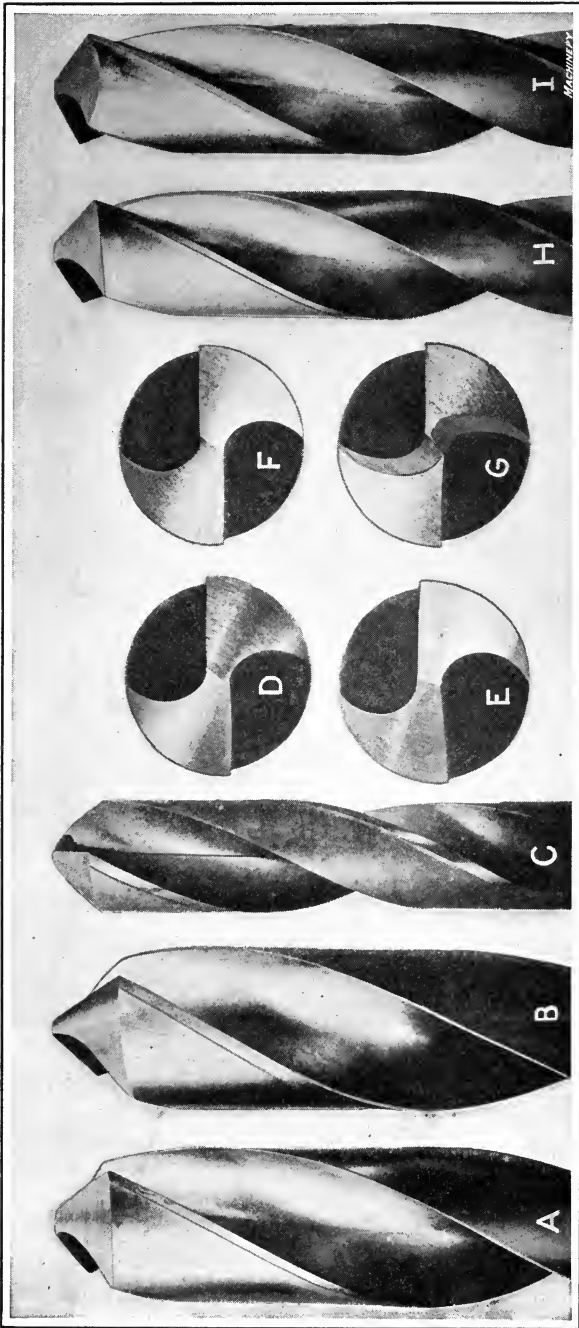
(A) Drill with Proper Clearance. (B) Drill with Insufficient Clearance at Center. (C) Drill split because of Insufficient Clearance and Incorrect Angle between Chisel Point and Cutting Edges. (D) End of Drill with Chisel Point making Correct Angle with Cutting Edges. (E) End of Drill with Chisel Point making Incorrect Angle with Cutting Edges. (F) End of Drill where Web has been properly thinned. (G) End of Drill where Thinning has been carried to Excess. (H) Another Drill with Proper Clearance. (I) Drill with Insufficient Clearance
